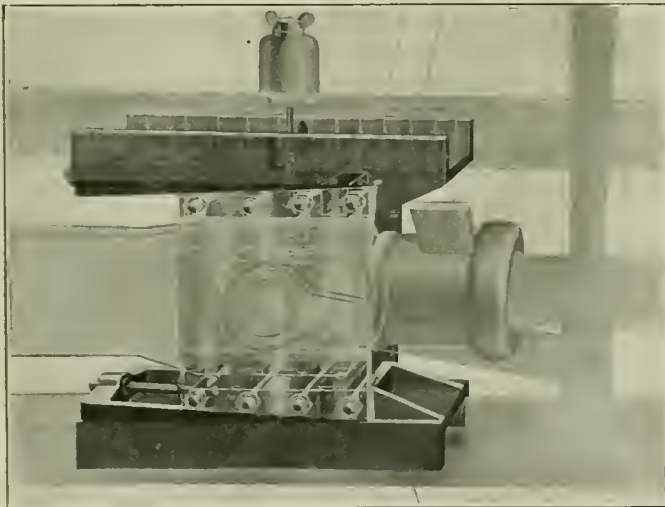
General View of Rogatchoff Adjustable Crosshead
